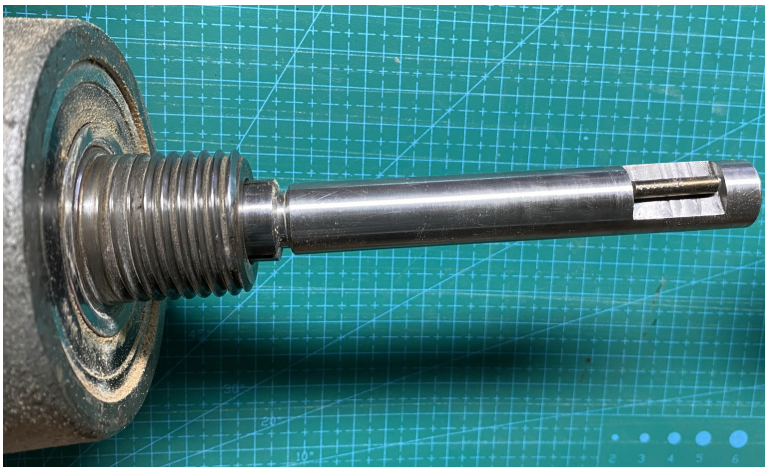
A $\frac{5}{8}$ " diameter pin mandrel, mounted in the lathe headstock using a MT2 collet chuck. Normally the pin in the flat recess is used to engage a $\frac{5}{8}$ " bored blank for turning.
